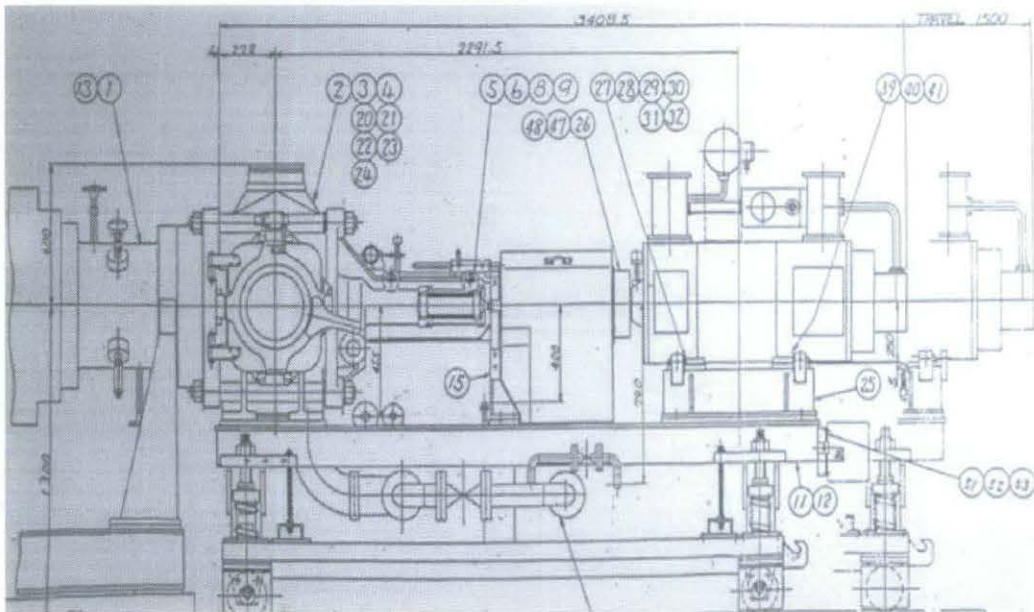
Overall assembly of pelletizer unit; pellet cooling water chamber window and DC motor drive end assembly<sup>1</sup>.
